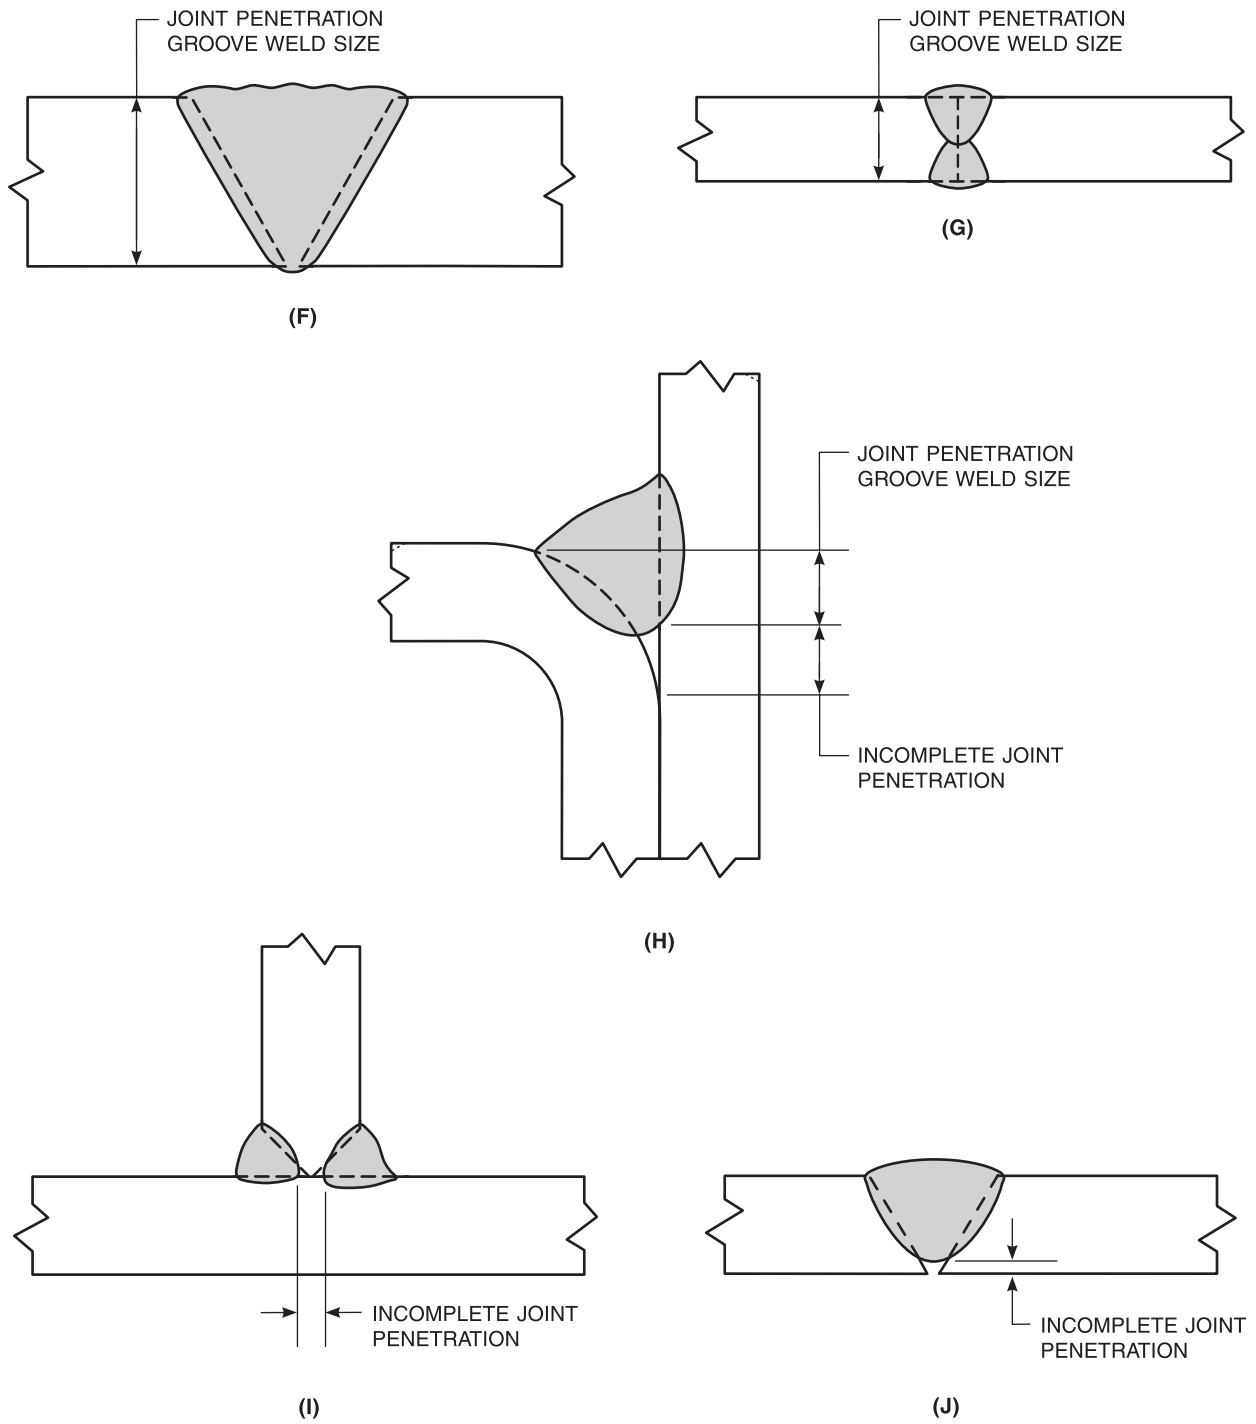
(Continued)—Groove Weld Size and Joint Penetration
